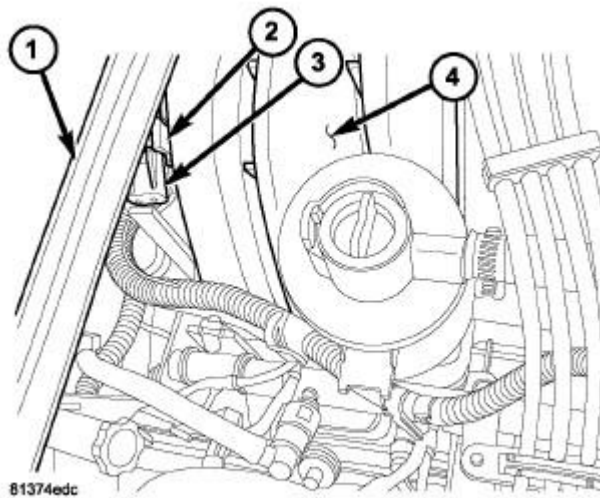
Locating Manifold Air Pressure (MAP) Sensor - 5.7L
